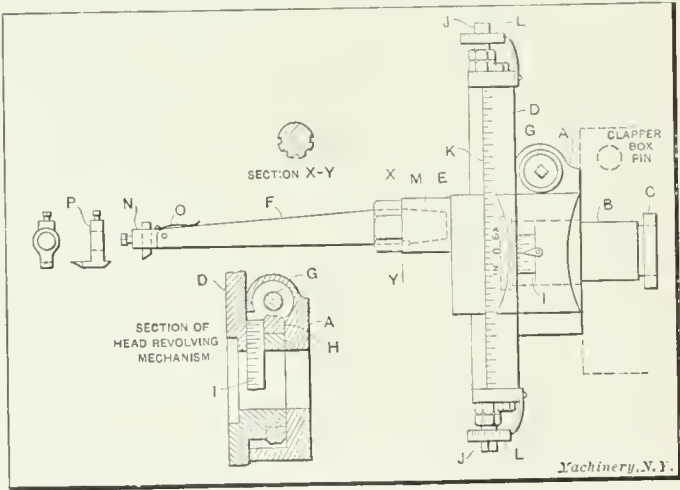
Universal Shaper Attachment for accurately Machining Internal and External Circles of any Radius
